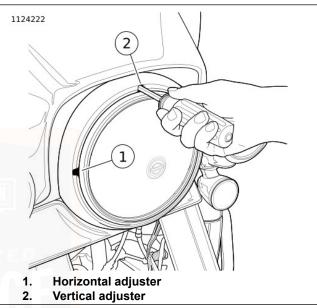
Headlamp Adjusters: All except Frame-Mounted Fairing (typical)
